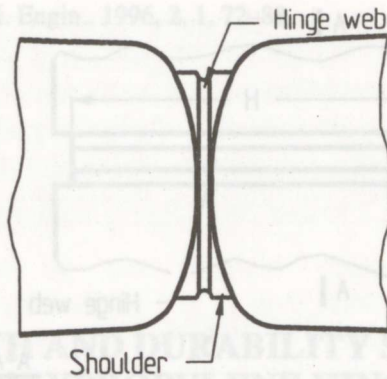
Shoulders to keep a straight hinge line in curved mouldings [3].
